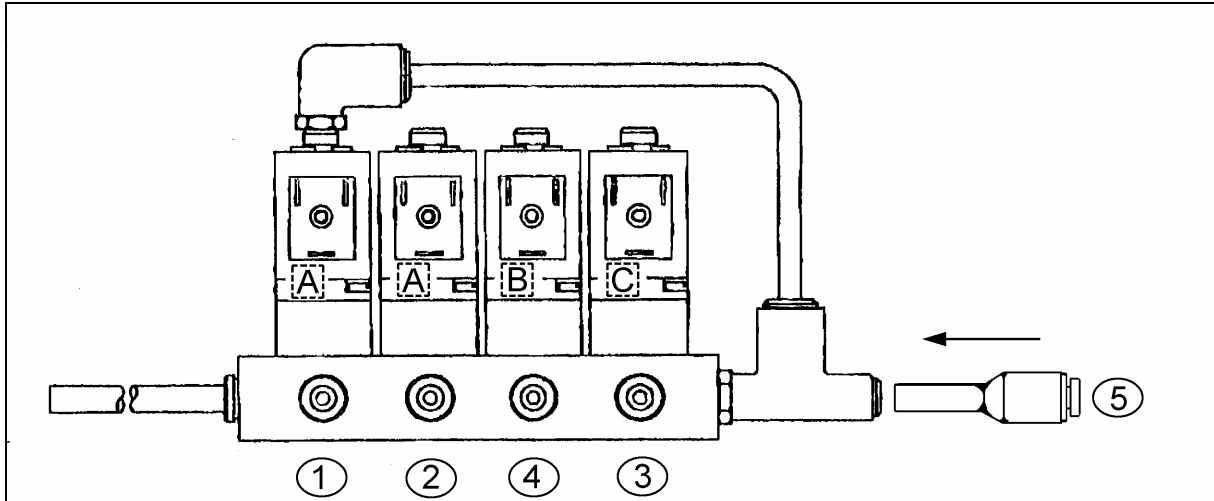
PROPER CONNECTIONS ON THE NEW MANIFOLD ASSEMBLY.
